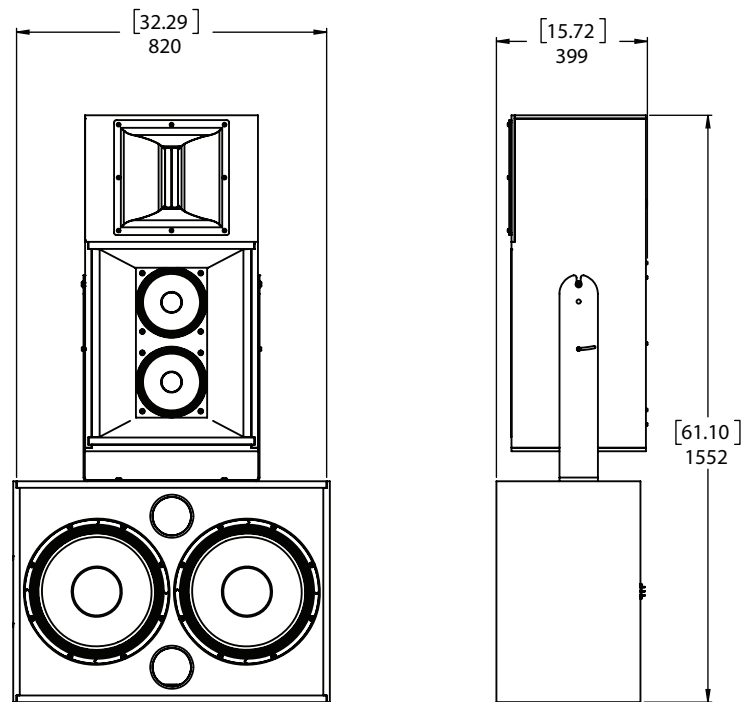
CS301MH Mounted with CSB215 (System 300A) in [Inches] Millimeters
